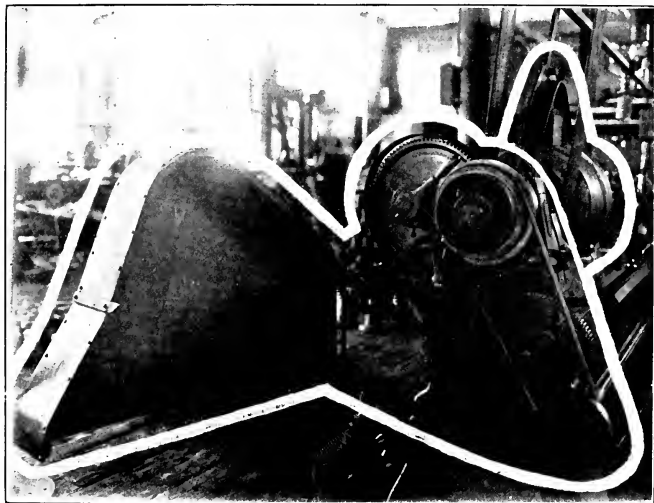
Illustration No. 28. Engine lathe with change gear guard open. Note cone pulley brake.
